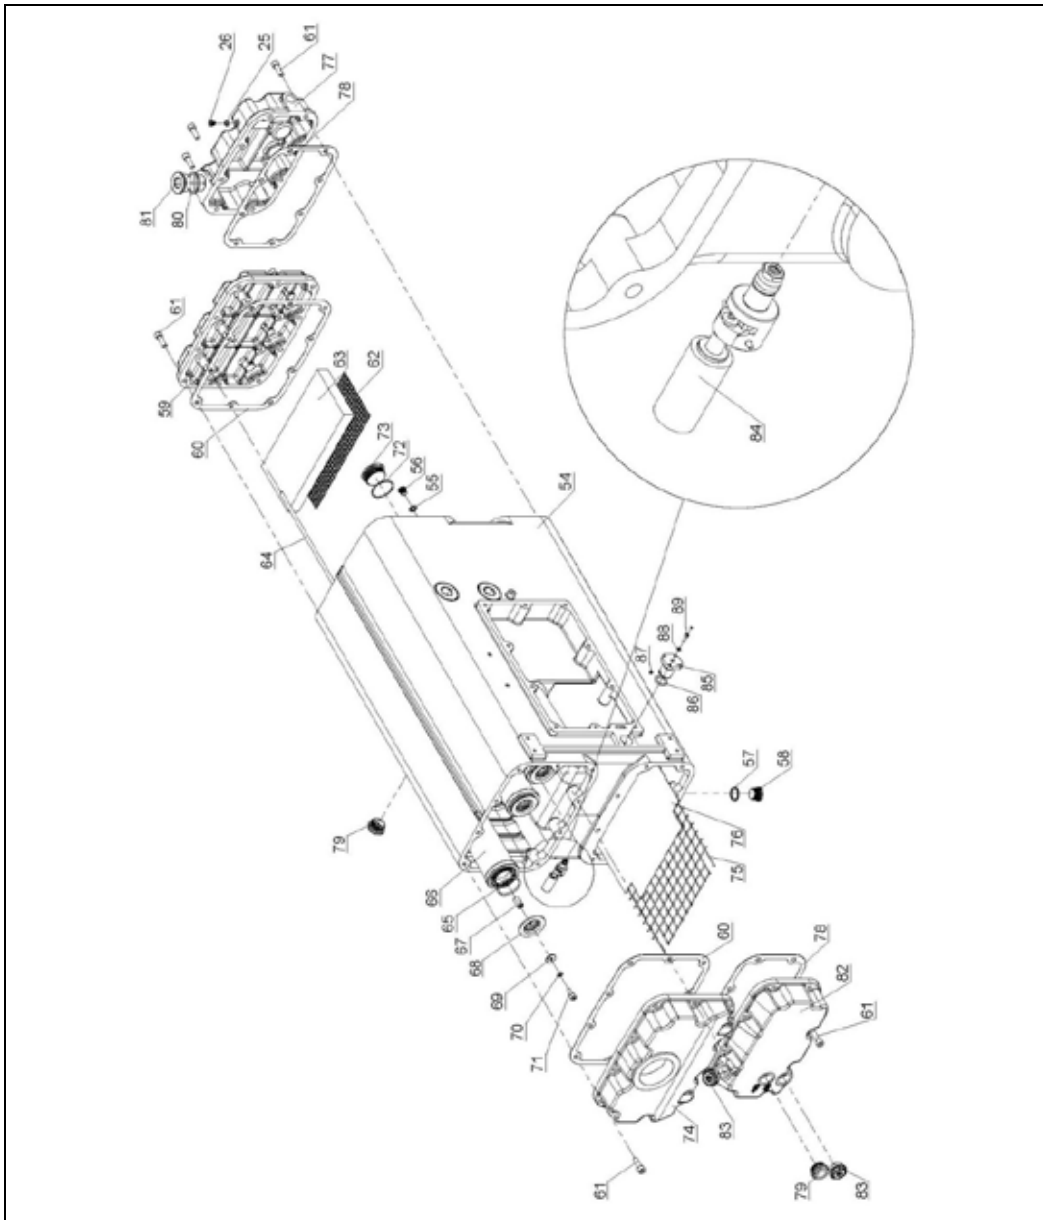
MS-631 Pump parts – Exploded View (4 of 4)
